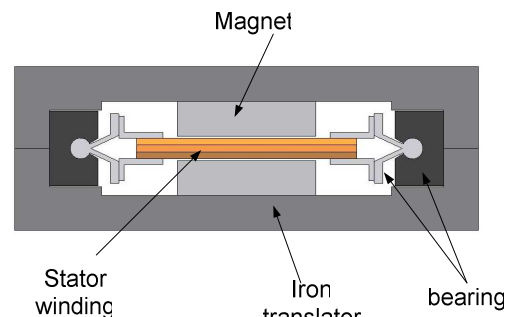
Integrated bearing and air-cored winding inside the C-core iron translator.
